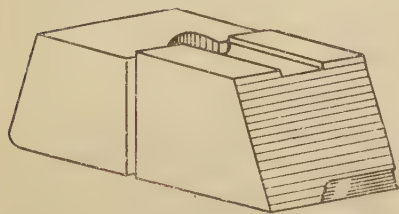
Dies or Grips for 1.1-in. Bar.
